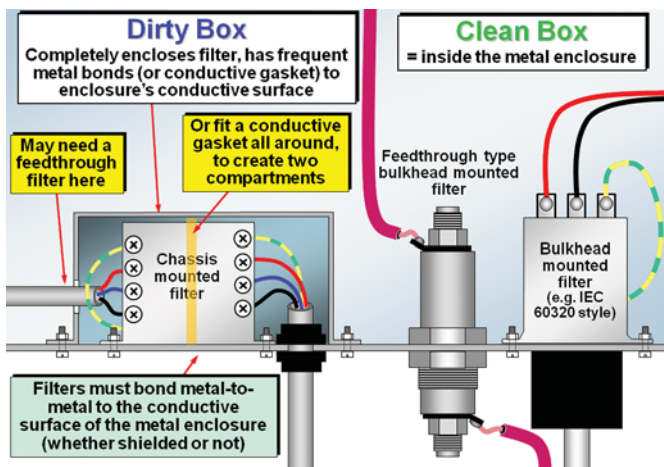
Good assembly techniques for filters in metal enclosures
